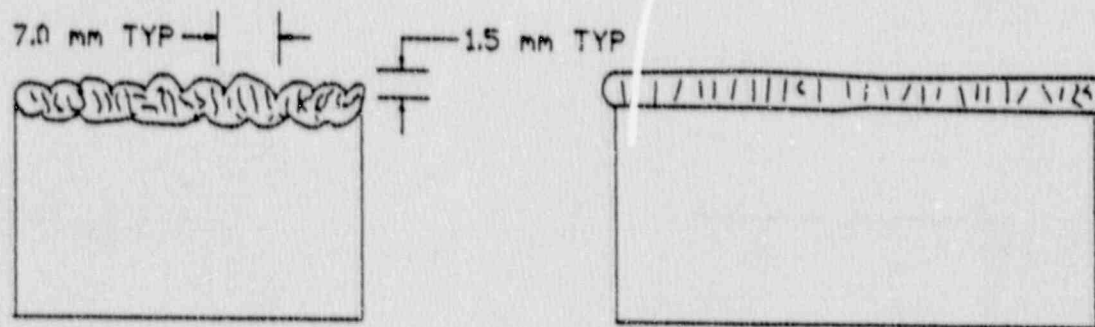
PRESSURE VESSEL CLADDING - SINGLE WIRE, MANUAL WELDING
